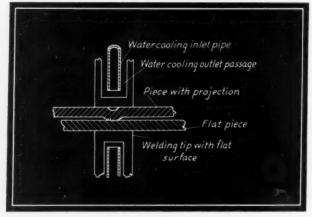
Projection welding joins sheets when one sheet is formed as shown here
